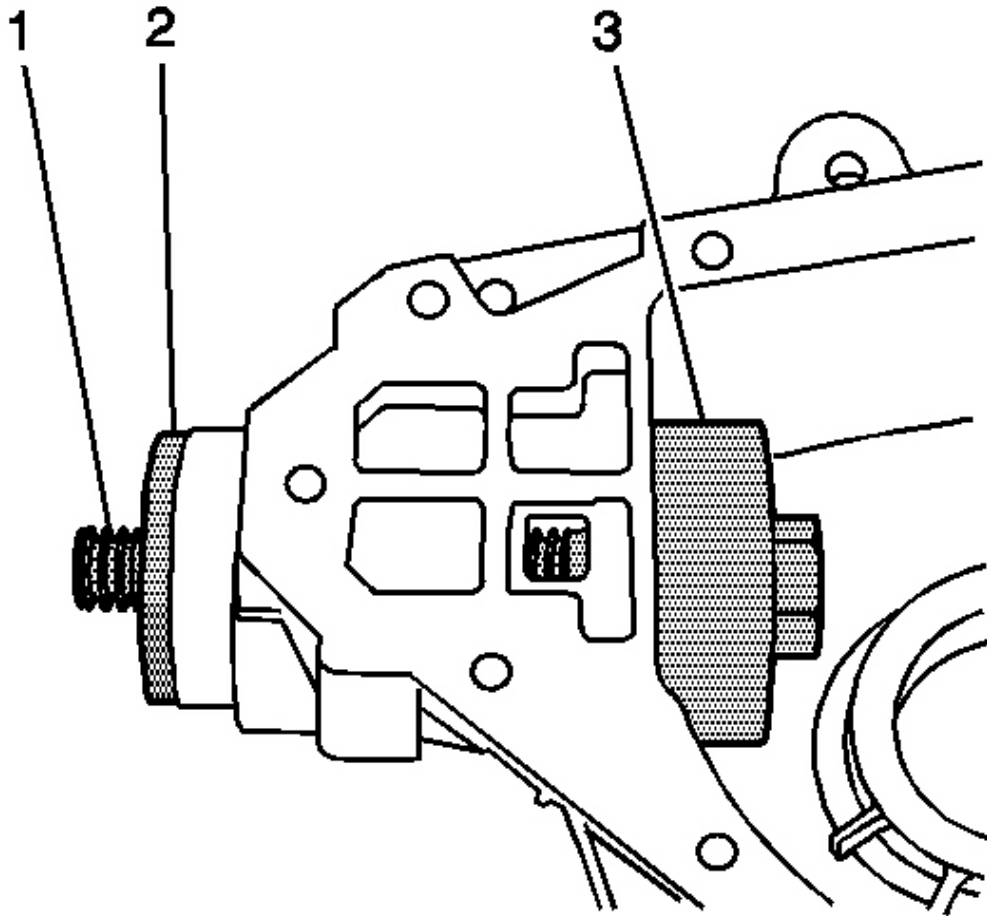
J 45228-1, J 45228-2 And J 45228-5 Installed Into Pinion Bearing Cup Bore
